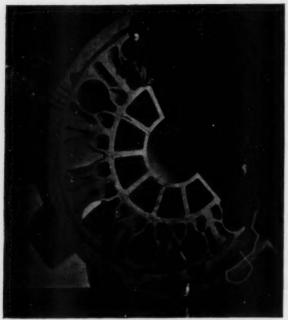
Front casing for DeHavilland Goblin gas turbine sand cast in Hiduminium R.R. 50. Diameter at intake face 37½ in. Center bore 3½ diam with four strengthening ribs ½ in. thick. Depth from intake face to outlet face 17 in. Elongated outlets 17 in. x 9 in. Entire weight 138 lb.
